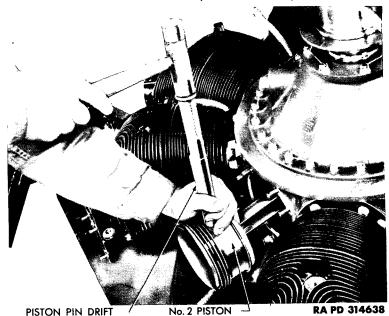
Driving Out Piston Pin Using Drift 41-D-1541-75
